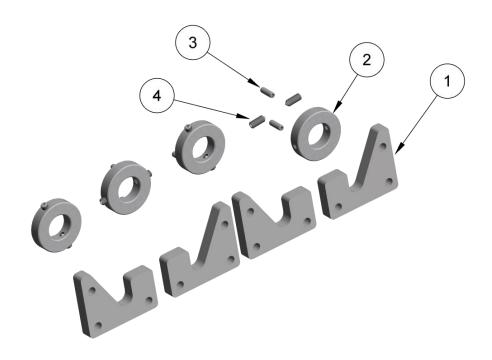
Picture with key - Cleaning sorting conveyor BRM [Drive complete]
